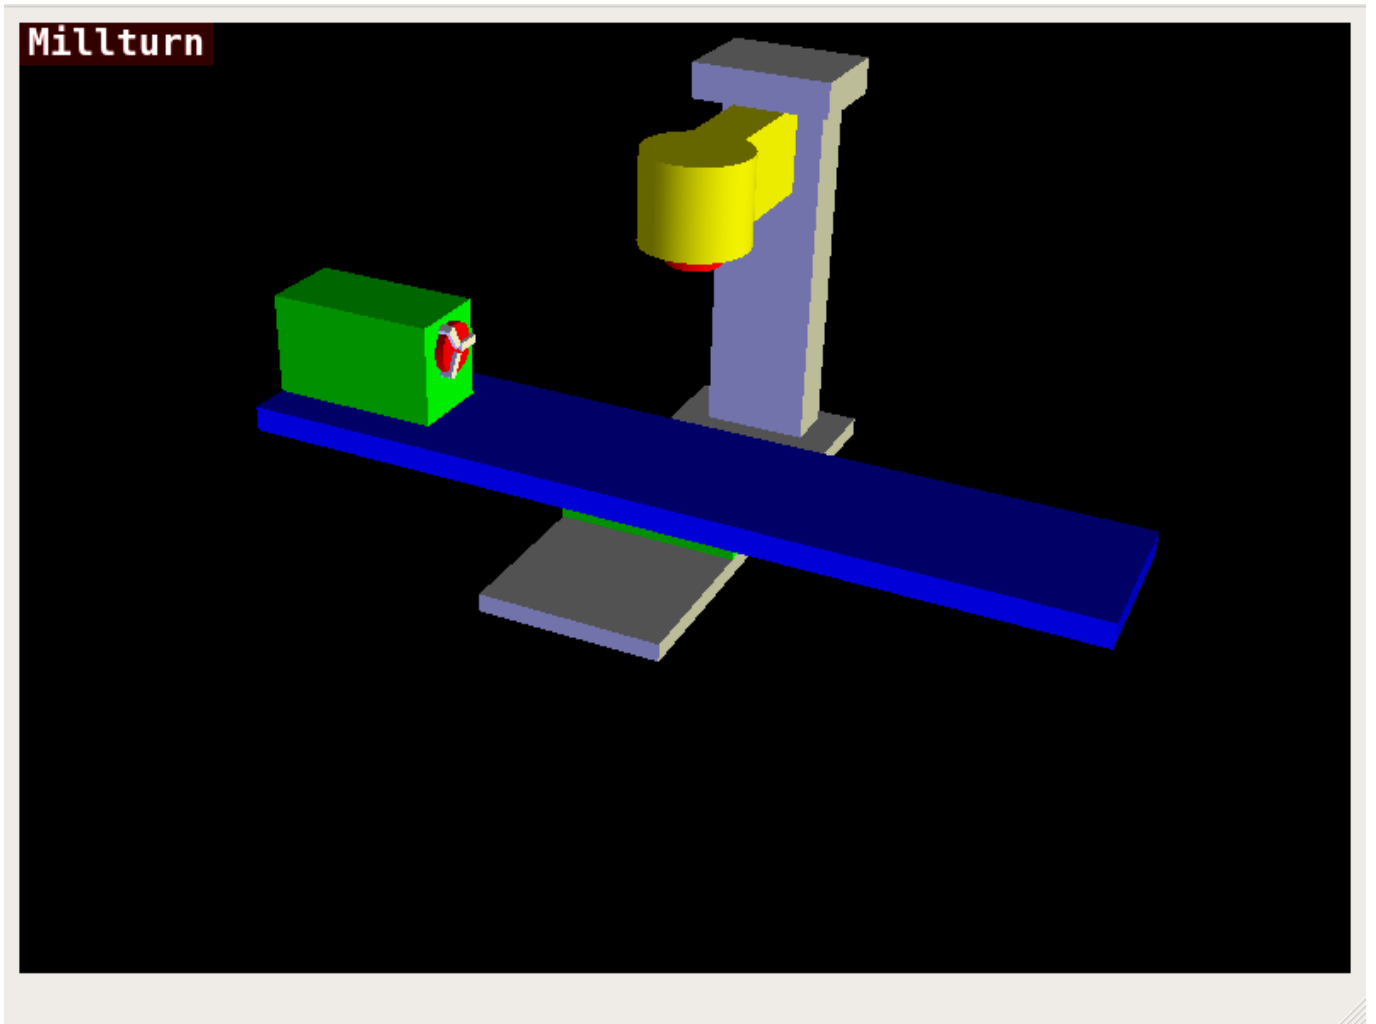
QtVCP vismach_millturn - 4 Axis MillTurn 3D View Panel
